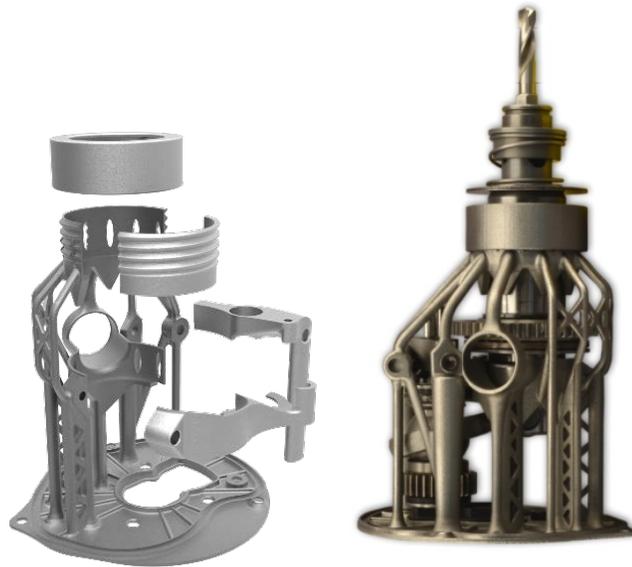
Design of the gears and bearing structure with the four additional parts (left), assembled part with gears and bearings (right)
